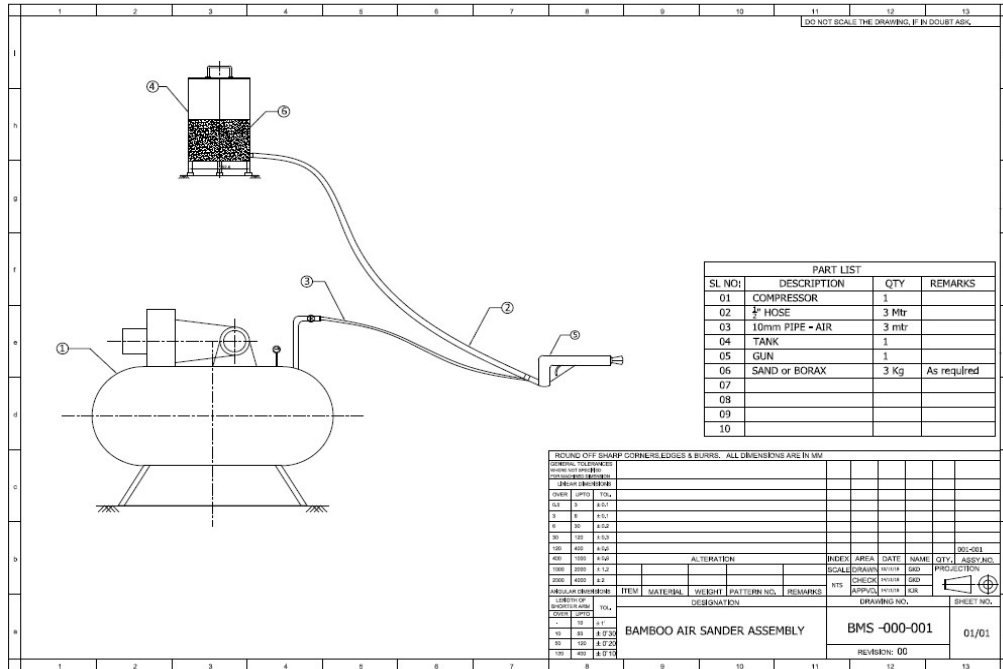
Main Assembly of the Bamboo Air Sander.
